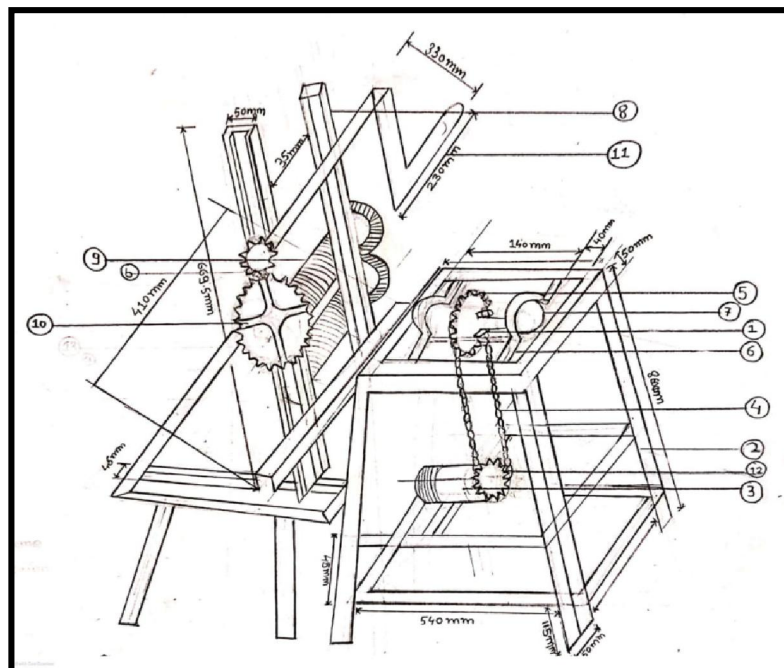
Assembly drawing of sugarcane peeler and juice extracting machine
